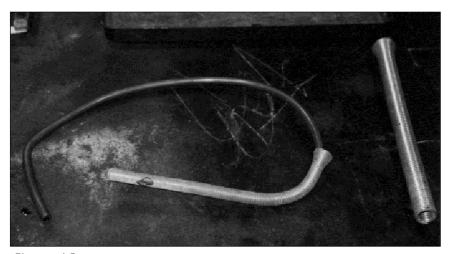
A type of copper tubing bending device (spring mechanism) used for properly bending copper tubing.
